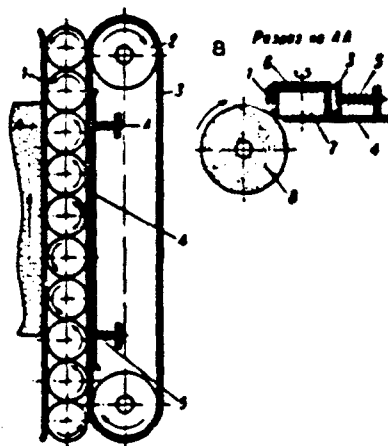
Diagram of general-purpose semiautomatic machine tool with continuous gradual displacement of workpiece: 1) vertical stand; 2) drive pulley; 3) belt that rotates and gradually advances workpiece; 4) clamp; 5) pressure springs; 6) workpiece; 7) bench; 8) abrasive cylinder. a) Section through AA.
